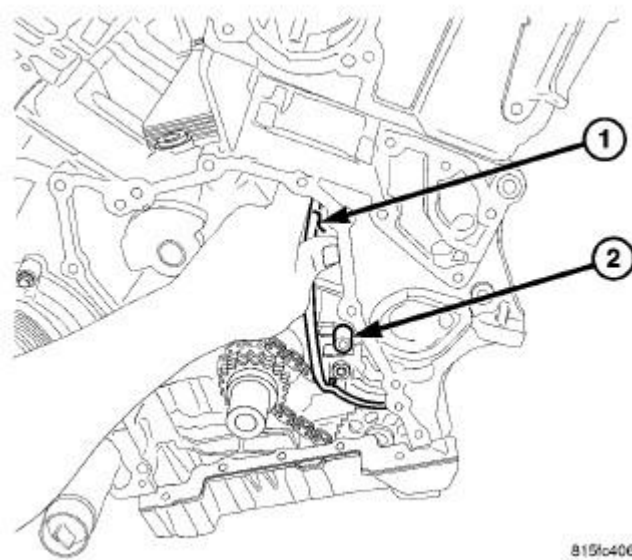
LEFT LOWER TIMING CHAIN GUIDE AND FASTENER
